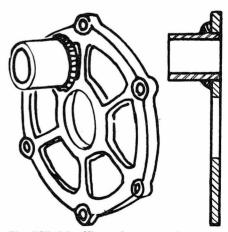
View of rotary valve cover showing method of installing tube for larger carburetor. Outside diameter of tube must fit carburetor and inside diameter of tube should match carburetor bore.
